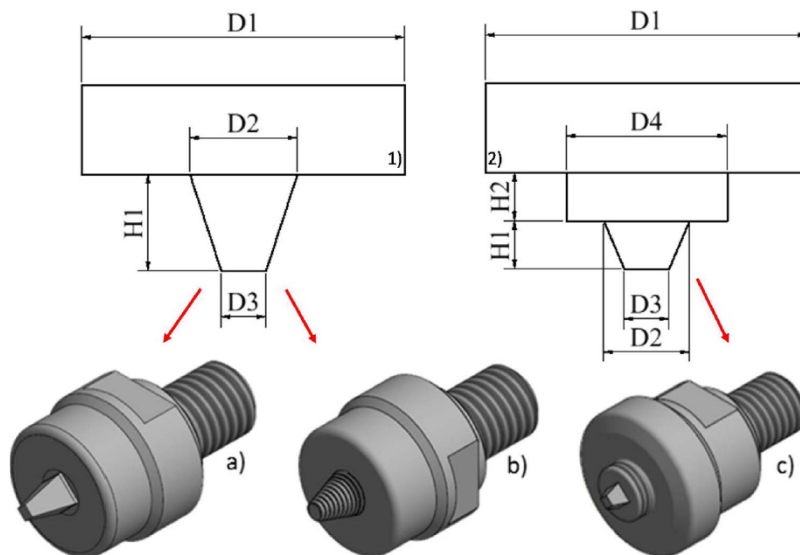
Schematic view and dimensions for the tool geometries tested: a) Pyramidal pin; b) Tapered and threaded pin; c) Progressive pin.
